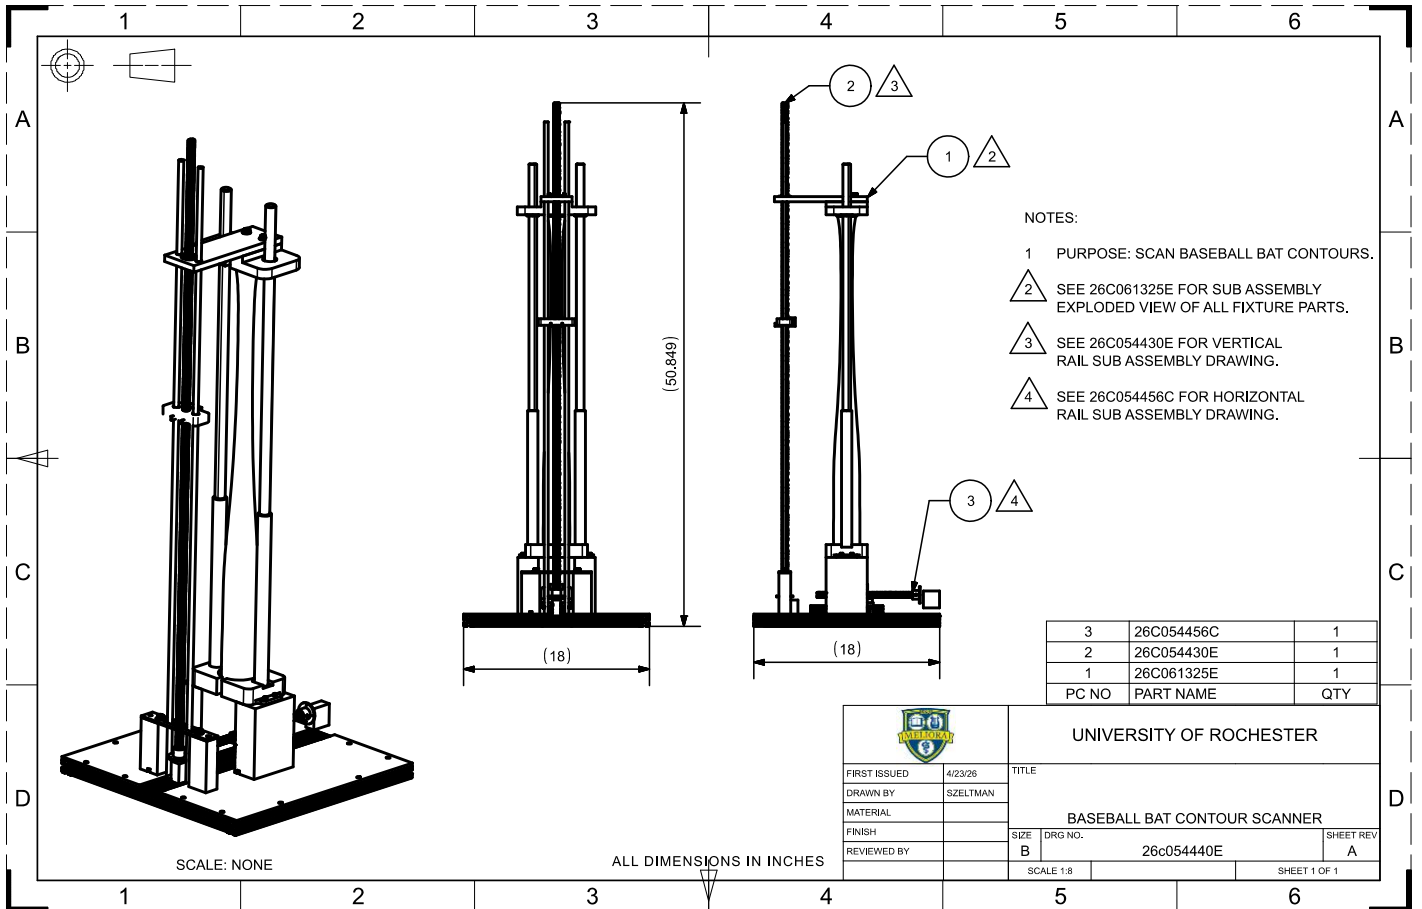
Top level assembly drawing containing 3 sub-assemblies.
